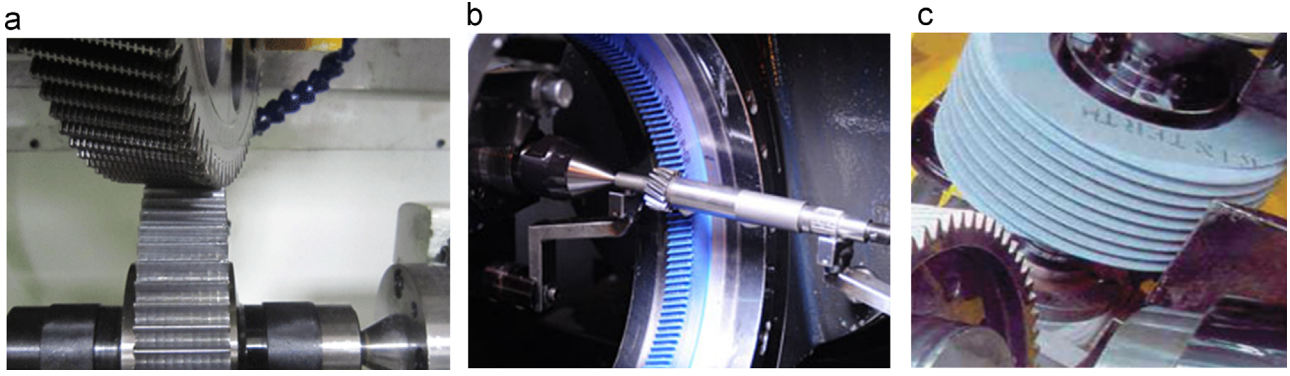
Tooth flank finishing processes: (a) shaving process, (b) power honing with internal meshing and (c) grinding with worm meshing [12].
